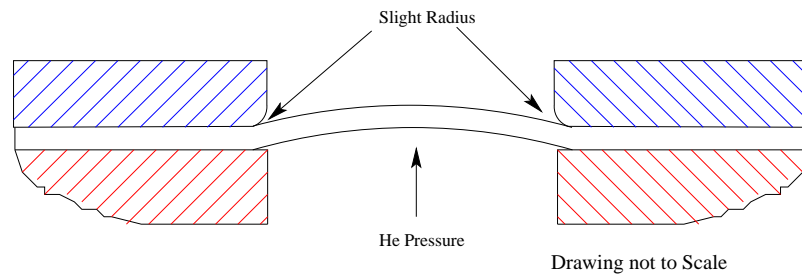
Cut away section showing the bulge test specimen clamped in the bulge fixture
